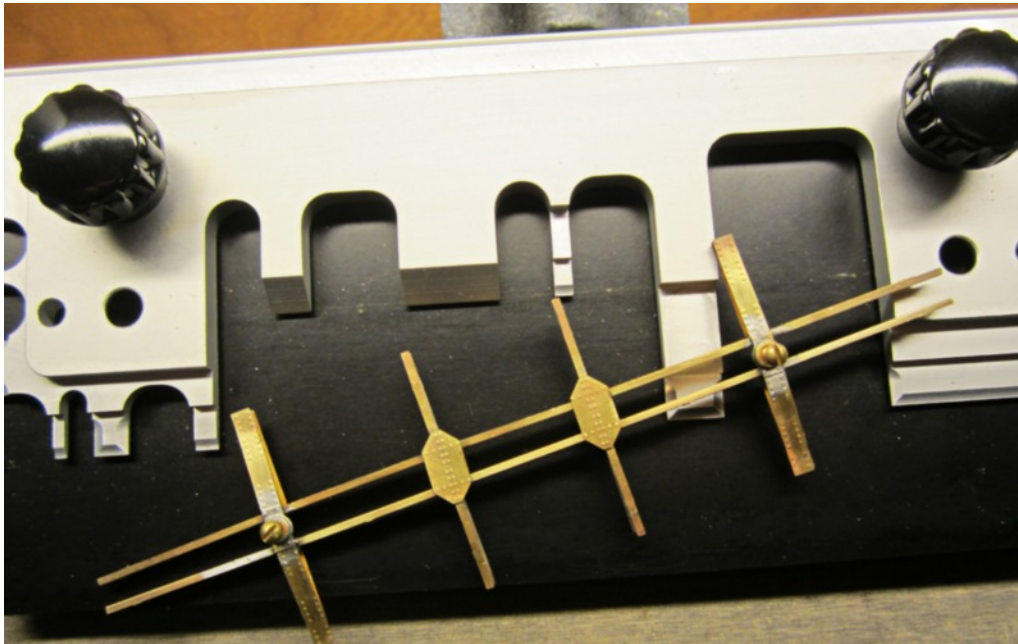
Here is the basic frame for the Mullet River Big Four caboose. It is lying on the bending and folding tool I used, but you can bend the pre-scored parts by hand if you wish. The frame consists of 20 separate pieces soldered together with a 60-watt iron, but only four of them require bending. I used pre-threaded 2-56 turnings, not in the kit, soldered in place for the bolster mounts.
